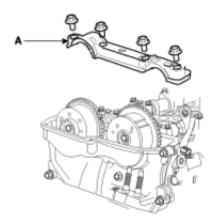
Identifying Front Camshaft Bearing Cap Courtesy of HYUNDAI MOTOR CO.
